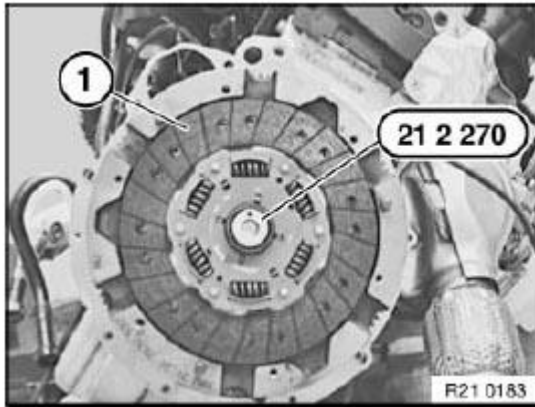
Identifying Centre Clutch Plate With Special Tool (21 2 270)
